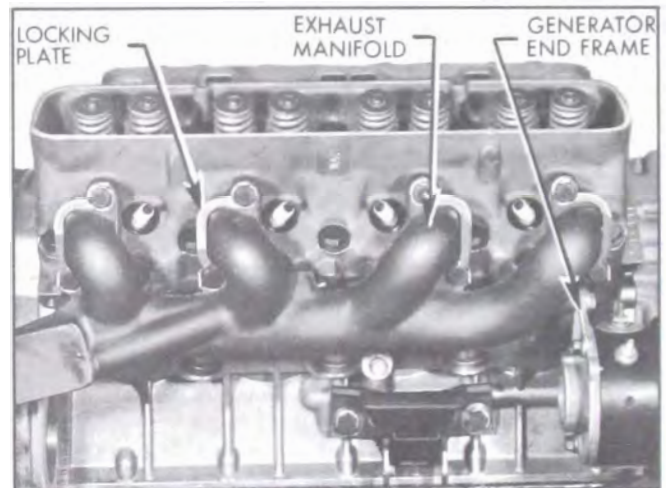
Exhaust Manifold Installation (V-8 shown)
